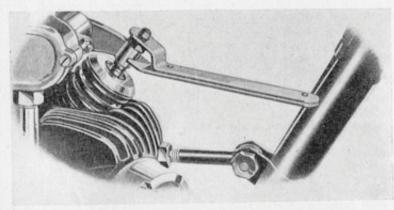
The A.J.S. Push-rod Extractor (1932-3)
